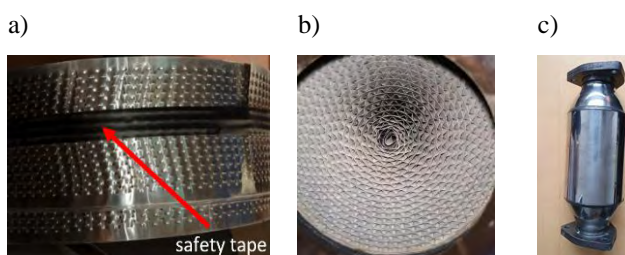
View of selected stages of metal carrier manufacturing: a) securing the film with tape before restoring the original shape b) cross-section of the finished carrier, c) view of the complete particulate filter
